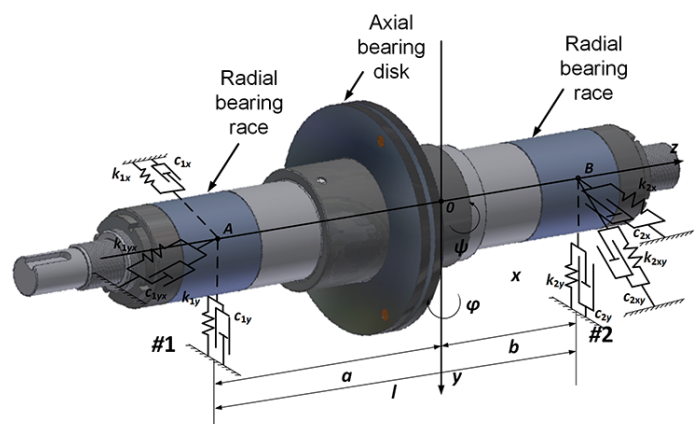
Rigid-body model of the rotor shaft of high speed rotating machine suspended on active magnetic bearings
